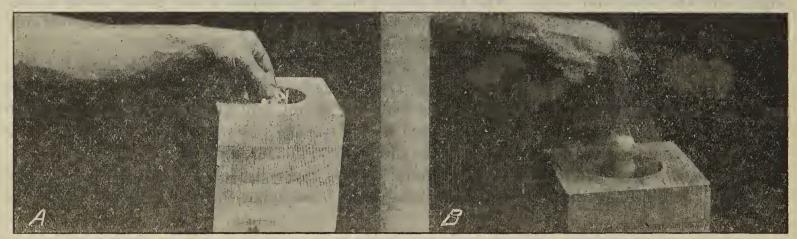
Aluminum leaf coating. (a) Applying leaf to large hub hole. (b) Smoothing off leaf in large hub hole.
